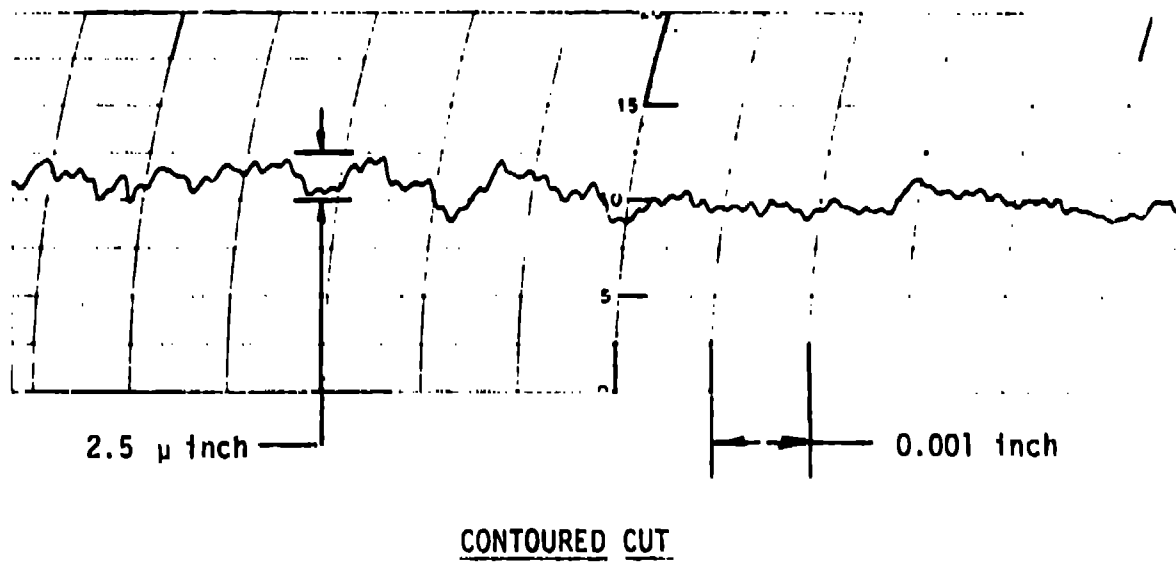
Surface Finish of Part Machined on Pneumo Lathe
